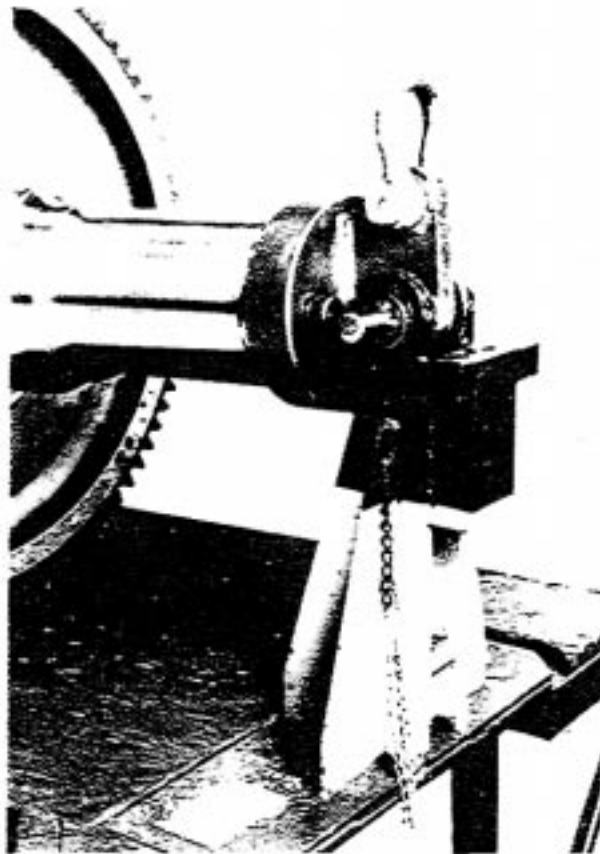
Axle/Gear Assembly on Platform in Build-up (Vertical) Position
